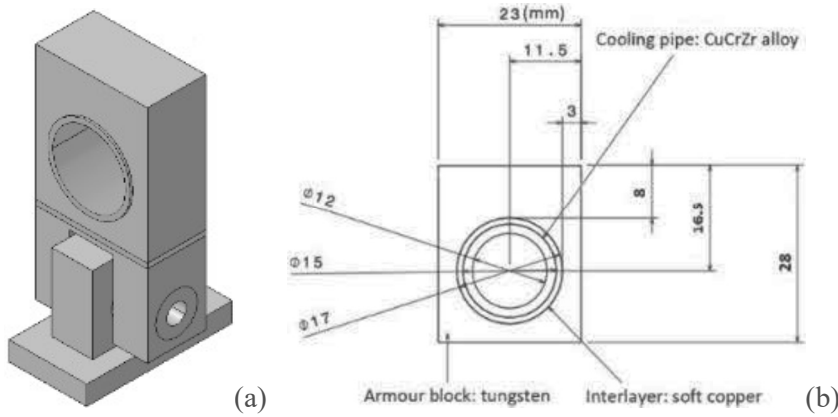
A typical single monoblock unit (a) and the technical drawing (b).
